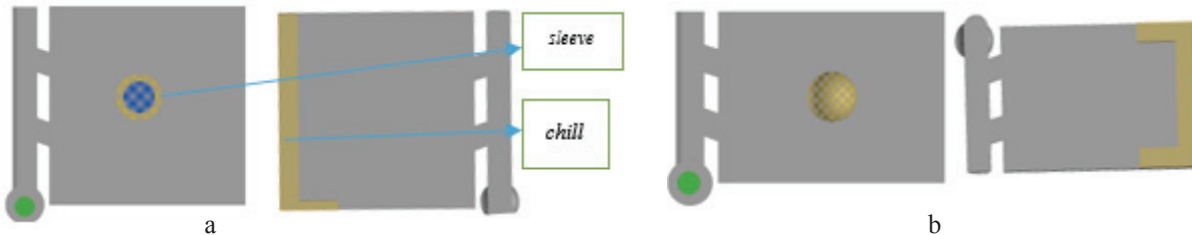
Plate test casting design for cylinders sleeve and cylinders feeder (a) and for dome sleeve (b)
